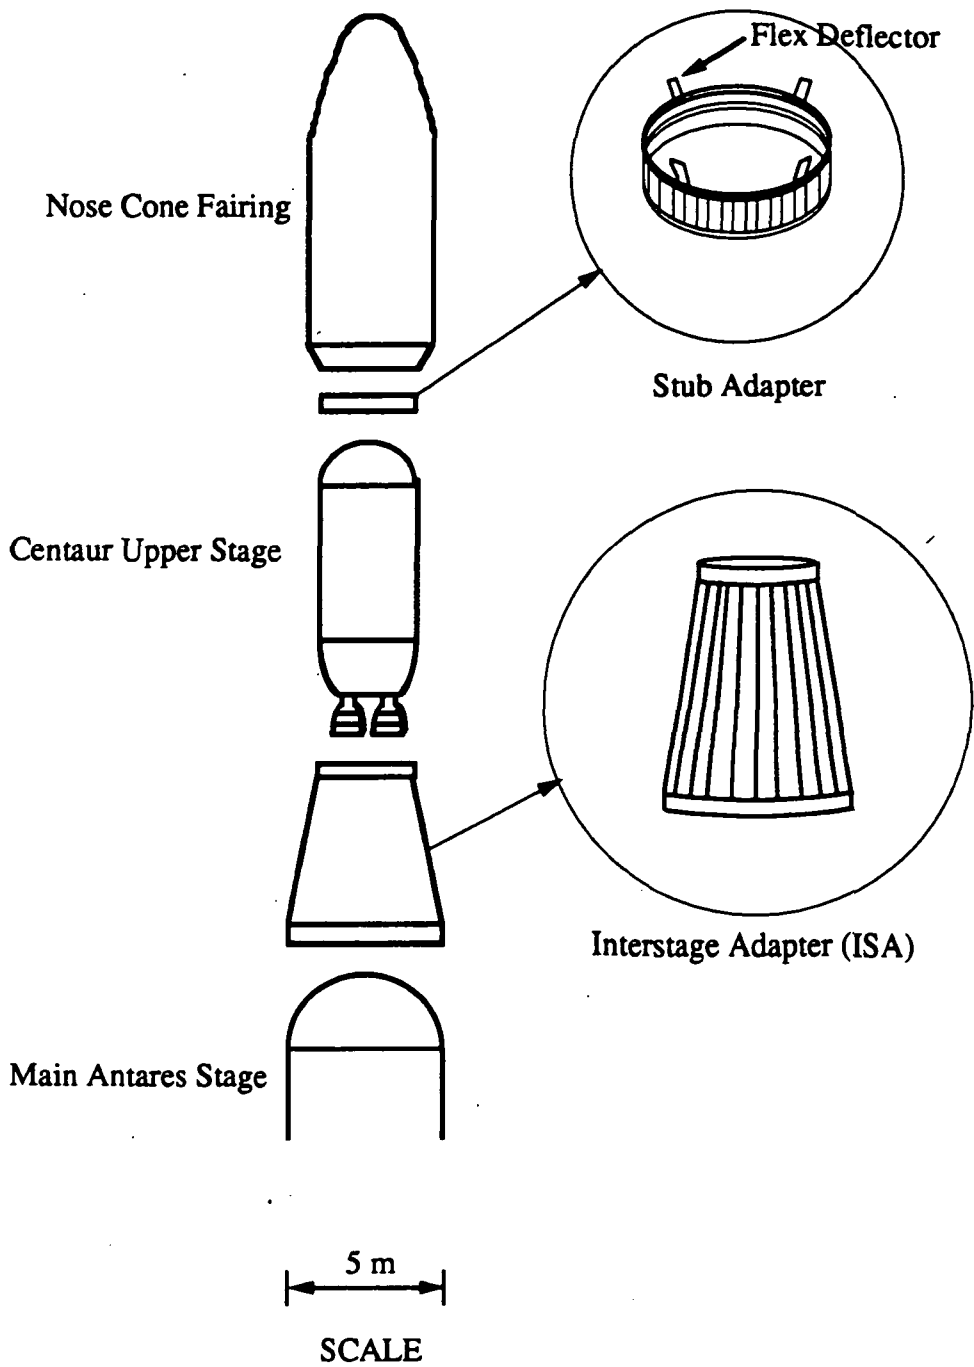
GEO mission-Antares upper section-exploded view.
